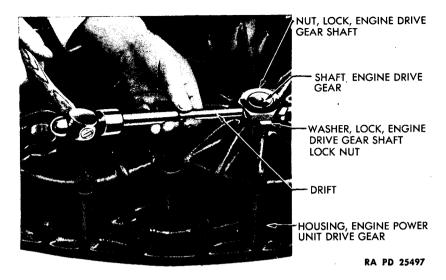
Bending Tabs Of Engine Drive Gear Shaft
